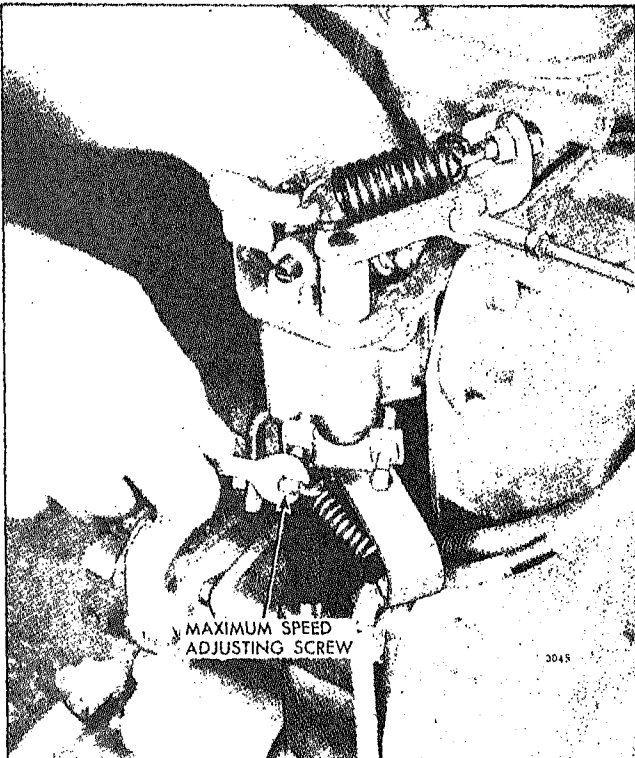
Adjusting Maximum No-Load Engine Speed
